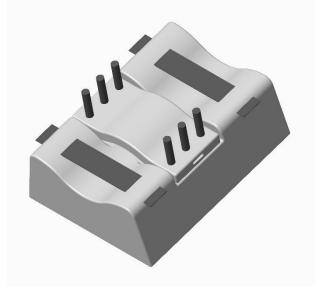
A CAD assembly of the casted one-bracket version of  $\it Iteration V$ .
